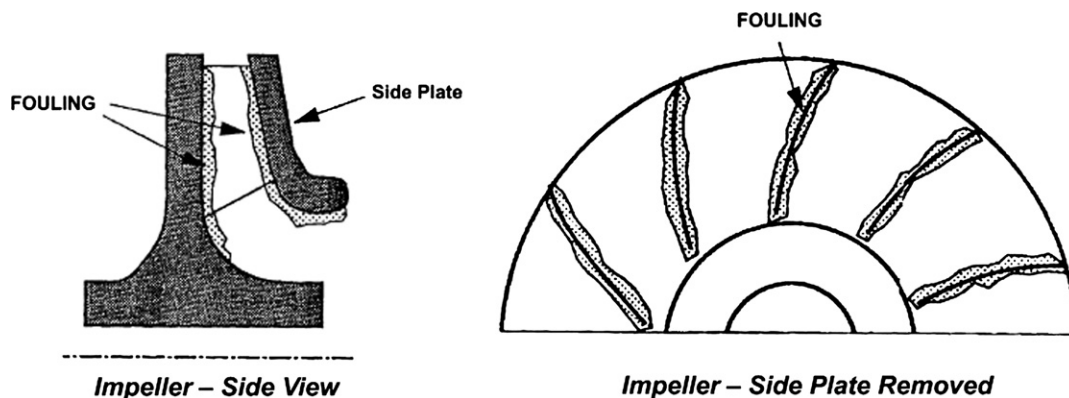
• Fouling — the effect on the operating point. Left: impeller — side view. Right: impeller — side plate removed
